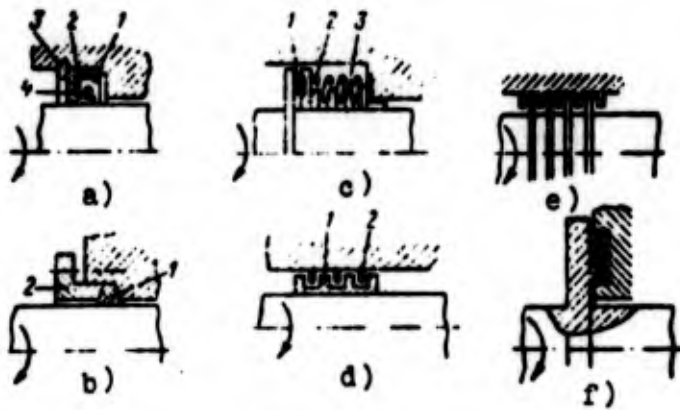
Packings: a) collar (1 - collar; 2 - ring of rigidity; 3 - check ring; 4 - spring); b) stuffing box (1 - stuffing box filling; 2 - bushing); c) bellows (1 - graphite ring; 2 - spring; 3 - bellows); d) annular (1 - bushing; 2 - sealing ring); e) labyrinth radial; f) labyrinth butt.
